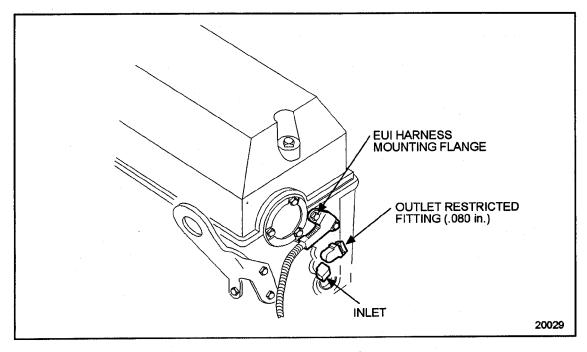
Fuel Gallery Inlet and Outlet Fittings
